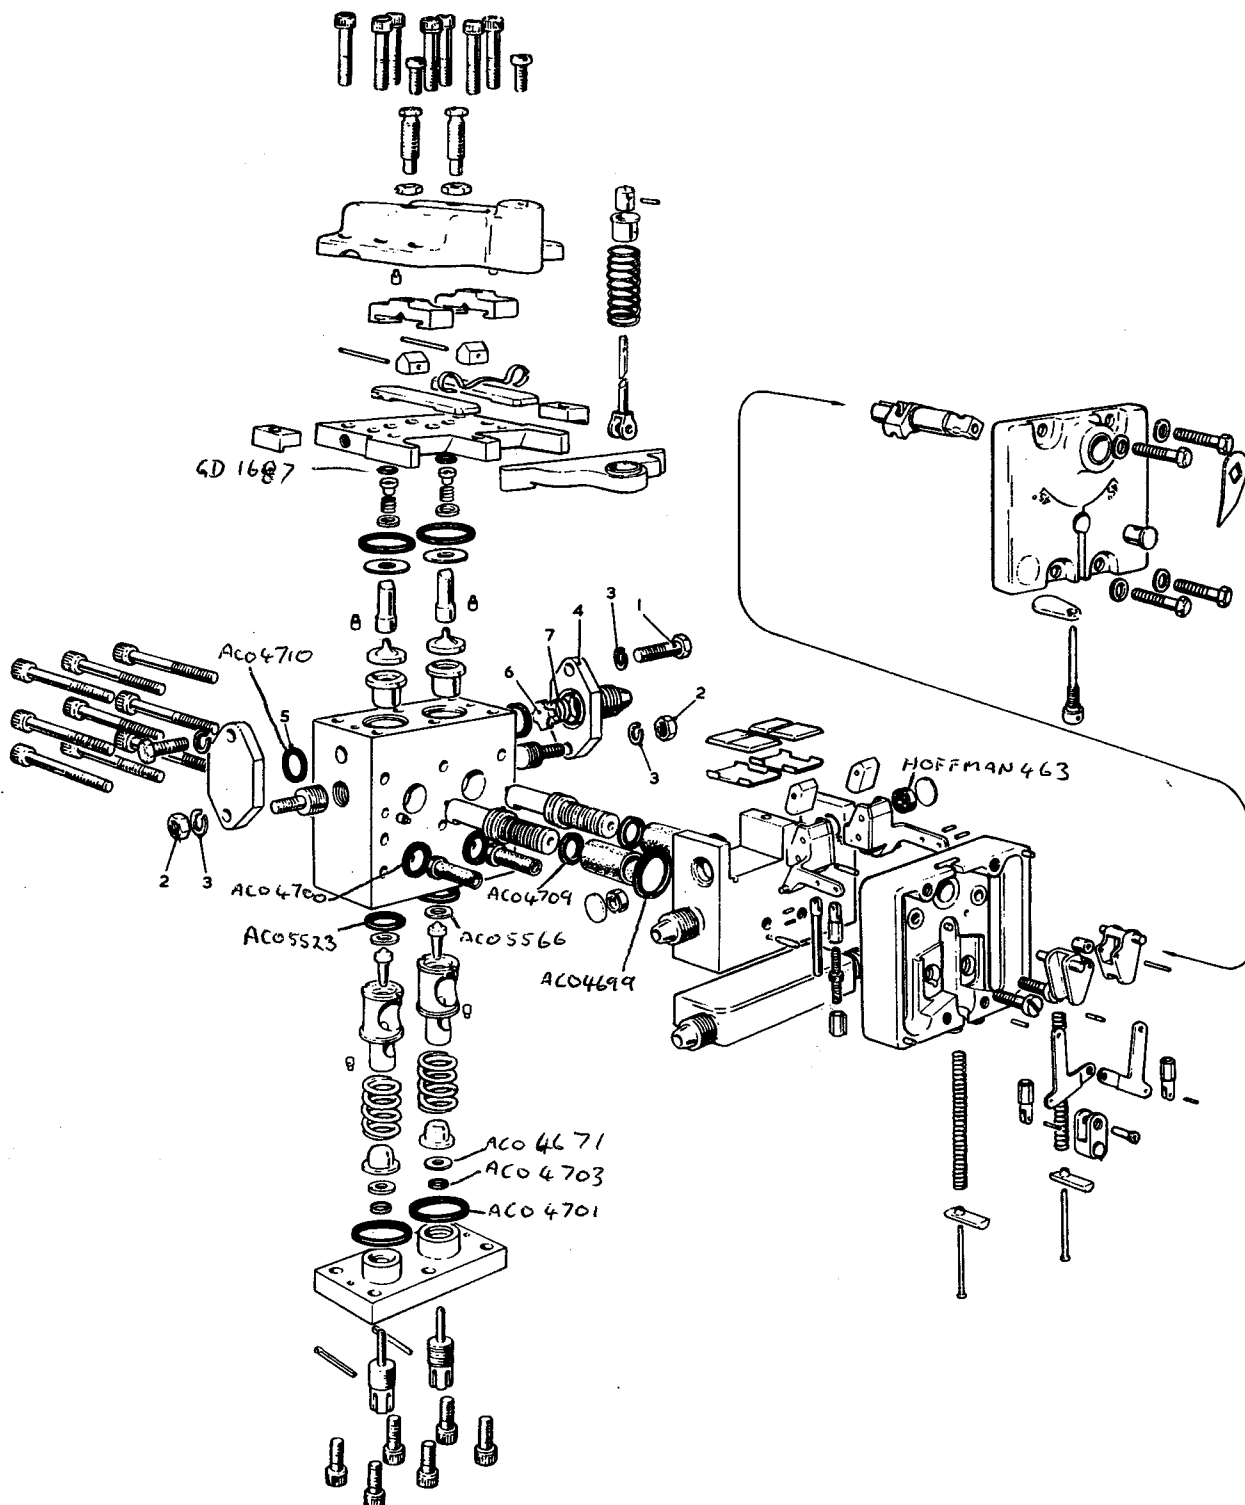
Hydraulic brake control valve assembly, Mk.3
